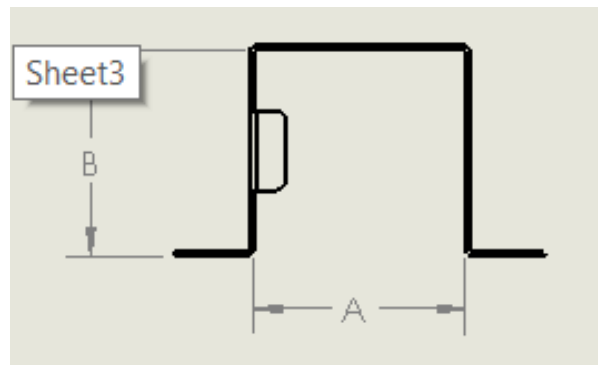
Critical dimensions (A and B) of bushing carrier to provide tolerances.
